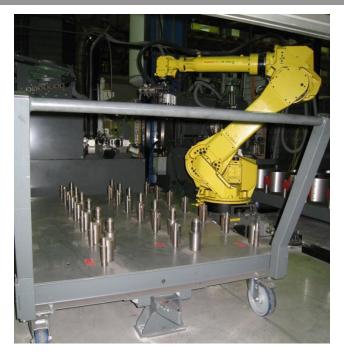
Robot material pallet at Sisu Axles brake shoe manufacturing cell.
